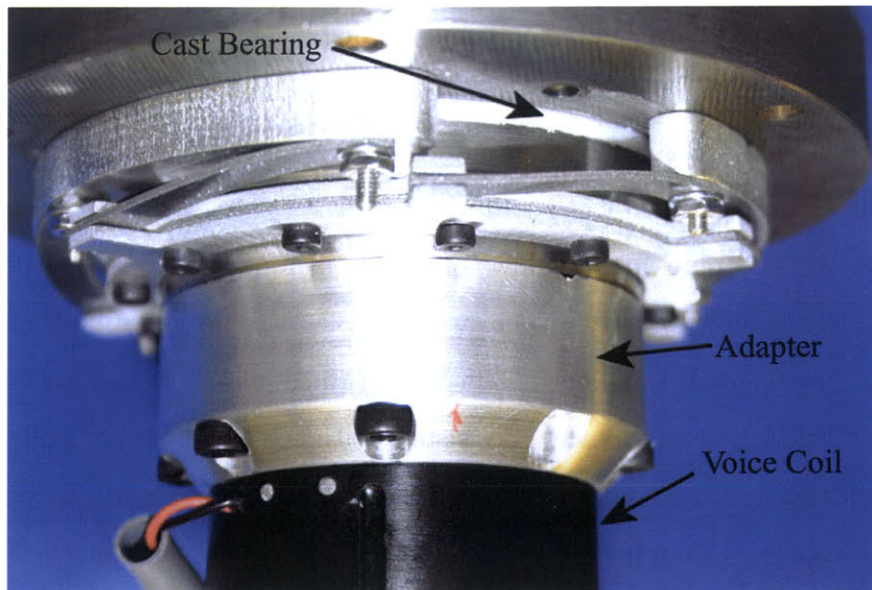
Photo of the cast rubber bearing after being fixtured in the compression configuration of Figure 5-5.
